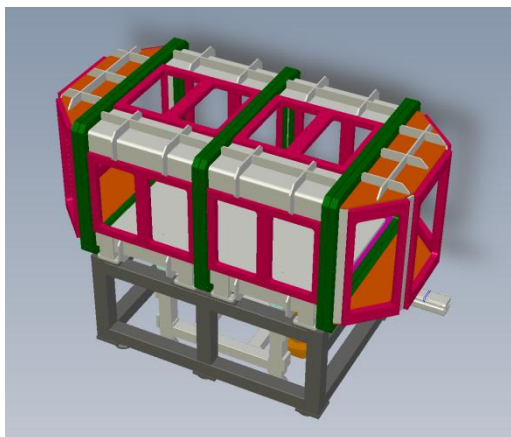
Construction view of modular target chamber concept. The individual sections have a short-side dimension of 1 m, which is suitable to be maneuvered into the completed hutch and assembled in place.
